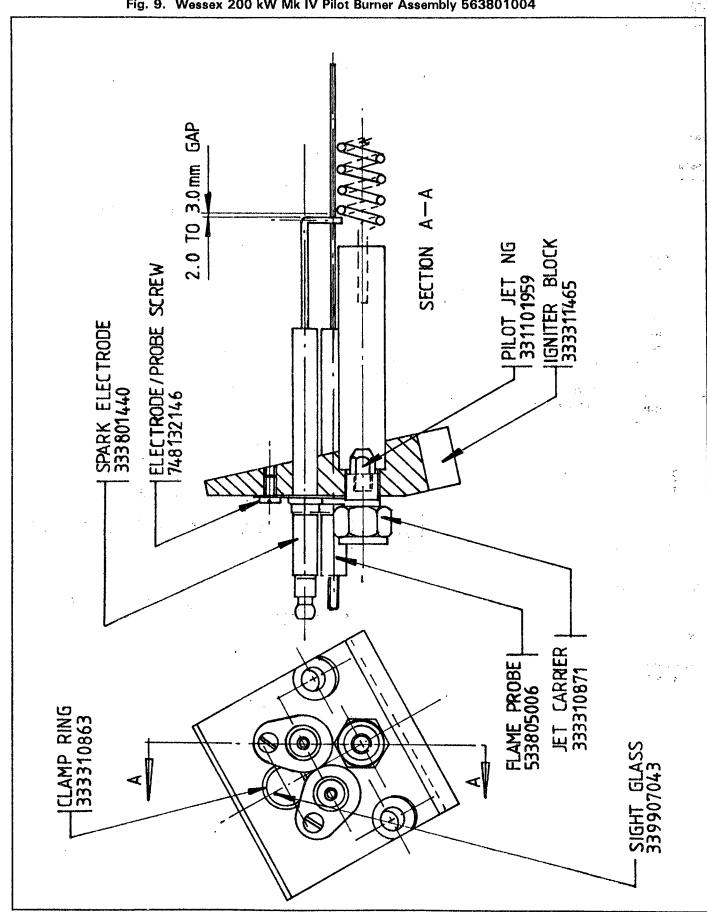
Wessex 200 kW Mk IV Pilot Burner Assembly 563801004
